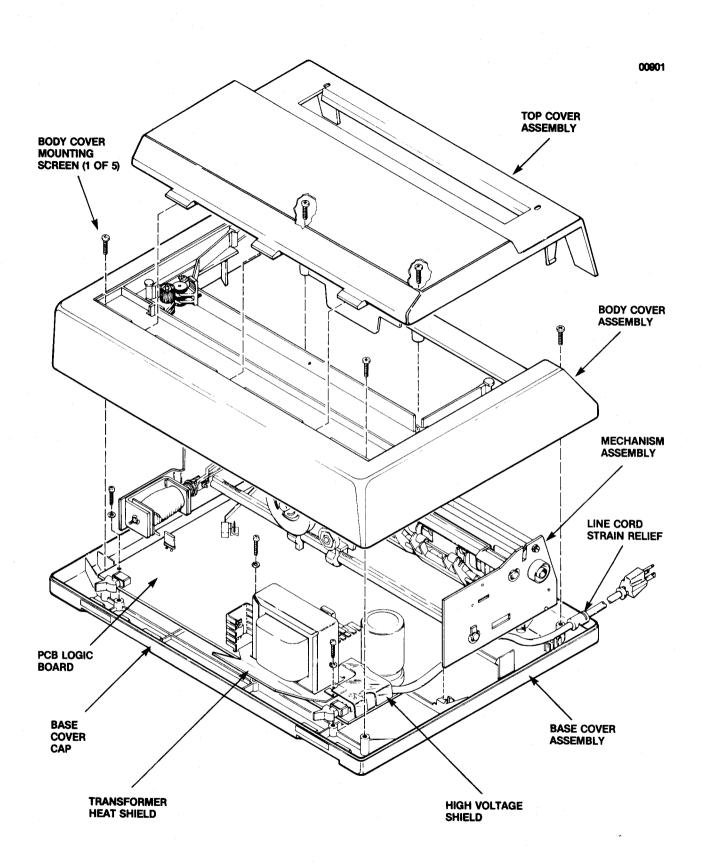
BASE AND BODY COVER ASSEMBLY REPLACEMENT
